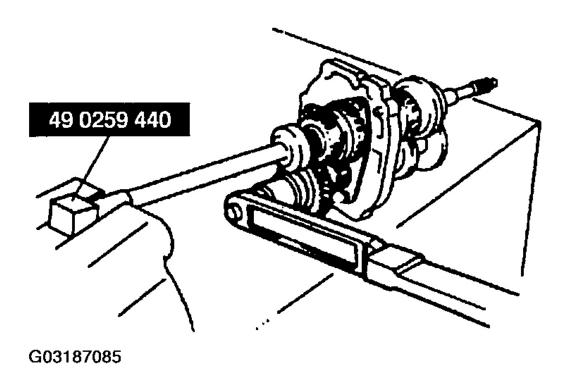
Tightening Locknut Courtesy of MAZDA MOTORS CORP.
